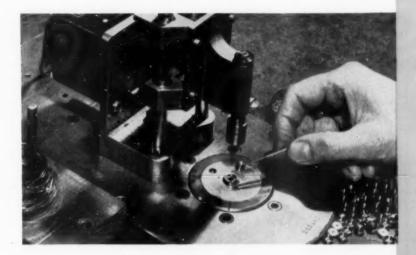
(left) Barrel is positioned in assembly fixture after spring has been wound around arbor.
